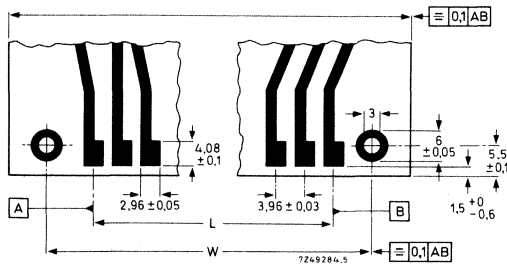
Recommended dimensions of the printed-wiring board; see Table 3 for dimensions L and W.
